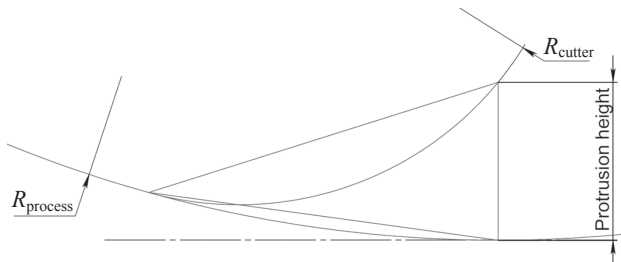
The protrusion formed during the milling process; $R_{process}$ is desired radius of the machined spherical surface; R_{cutter} is the radius of the milling cutter tip used for machining
